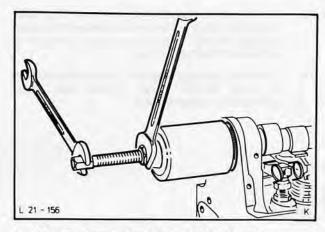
Fit oil seal, using Special Tool 21-009-A
